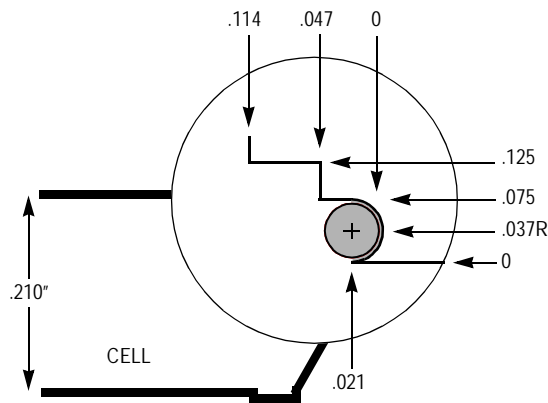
O-Ring to Sensor Cell Interface Dimensions
